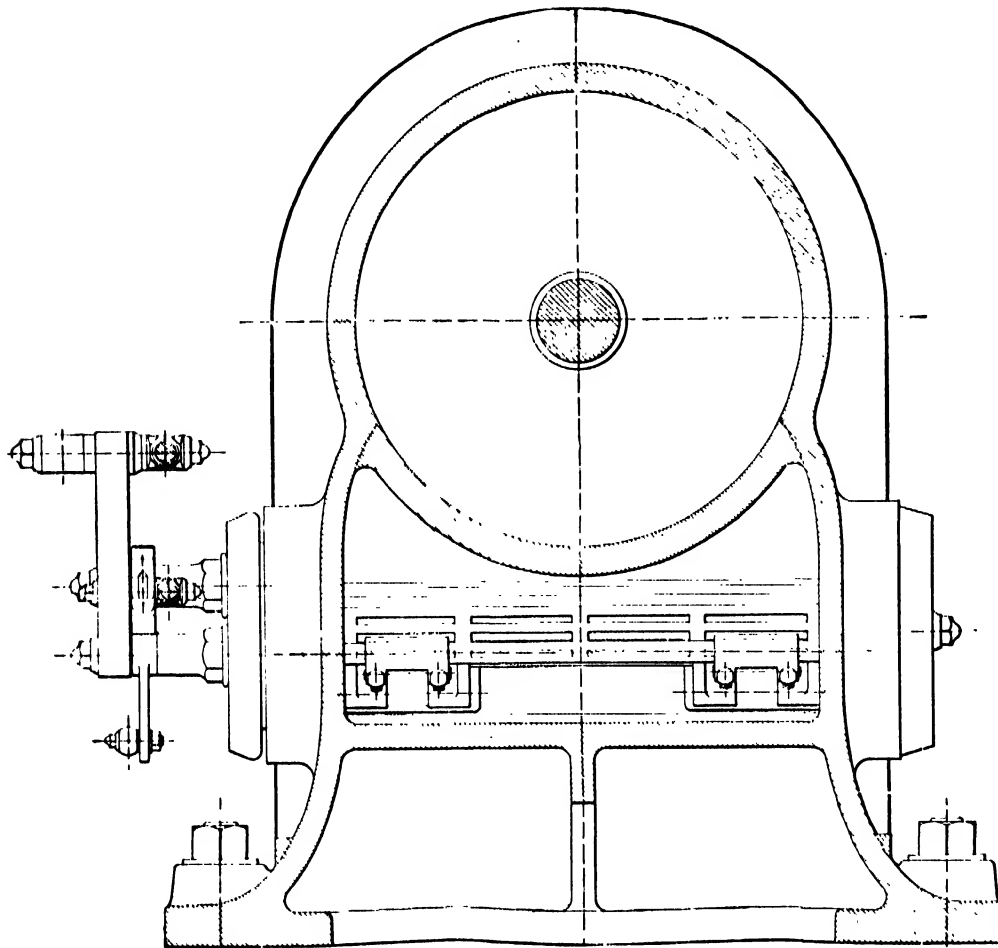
Wheelock Engine. End Section through the Cylinder
